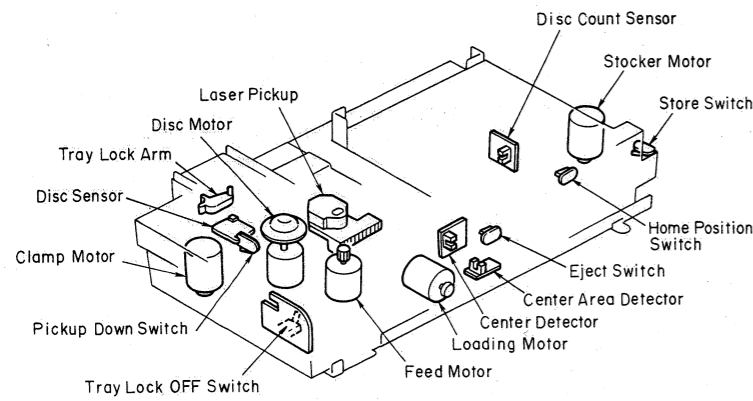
Electrical Parts Location in the Mechanism Ass'y
